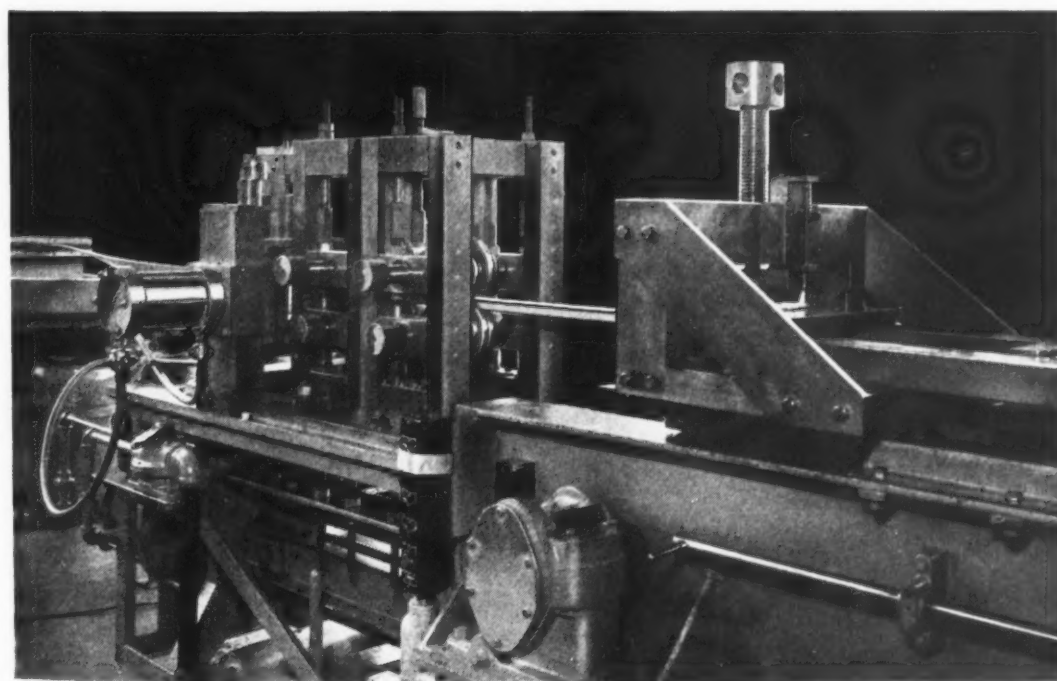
(Above) Large Roll-bending Machine Employed for Preforming Sheet Duralumin Used for Wing Covering and Purposes of a Similar Kind
